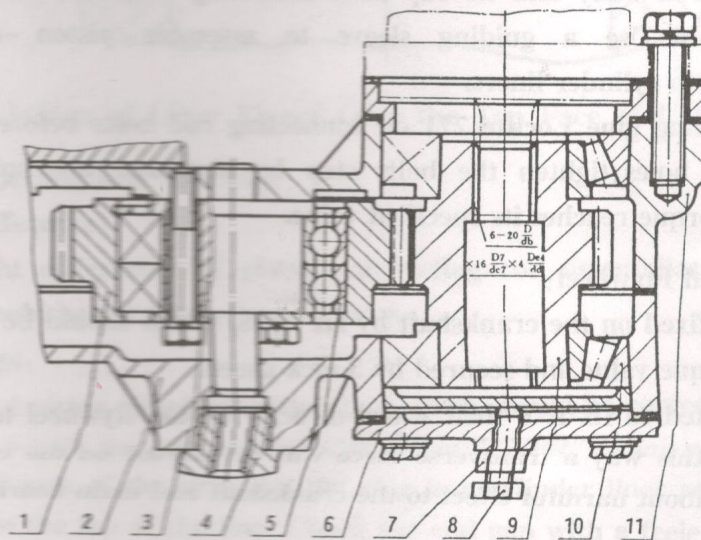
Driving Gears for Hydraulic Pump 495BPG
